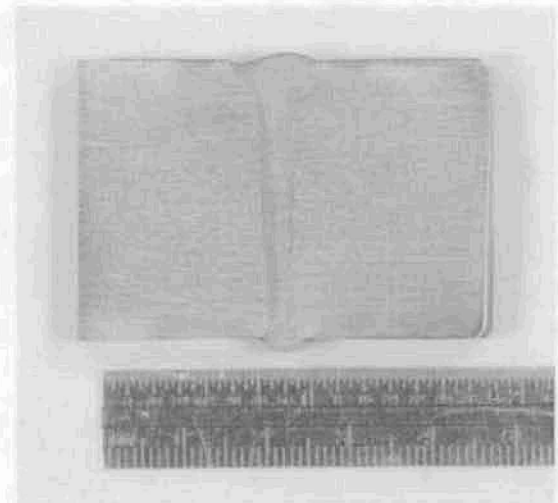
Macrograph of a RPEB welded Alloy 22 plate
